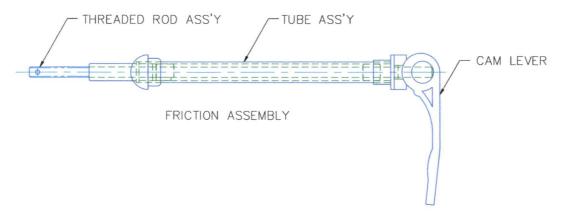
Cyclic Friction Assembly – 95210
